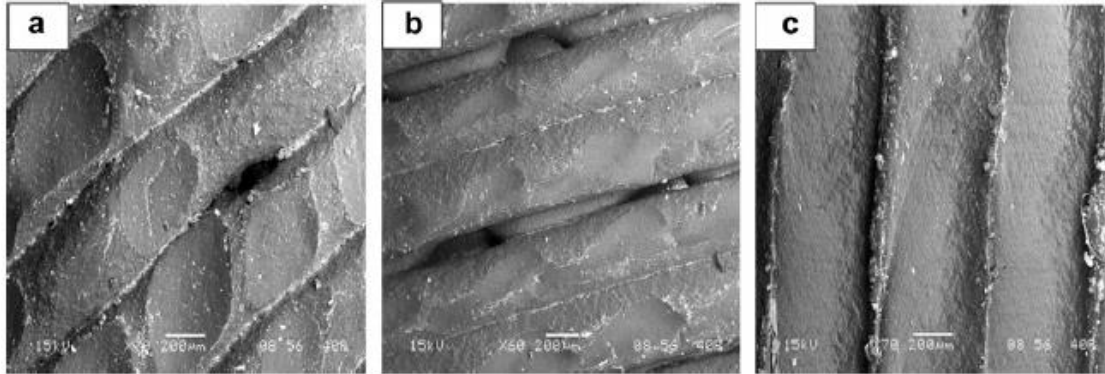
WELD IMPERFECTIONS OF FDM PARTS – SOOD ET AL.
